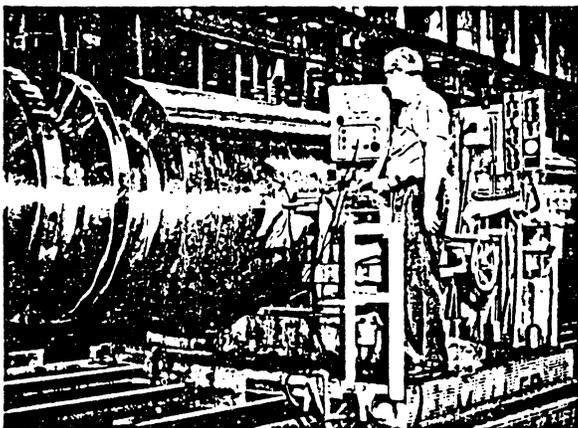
Ultrasonic testing of a 115-ton generator rotor forging using automatic scanning.
